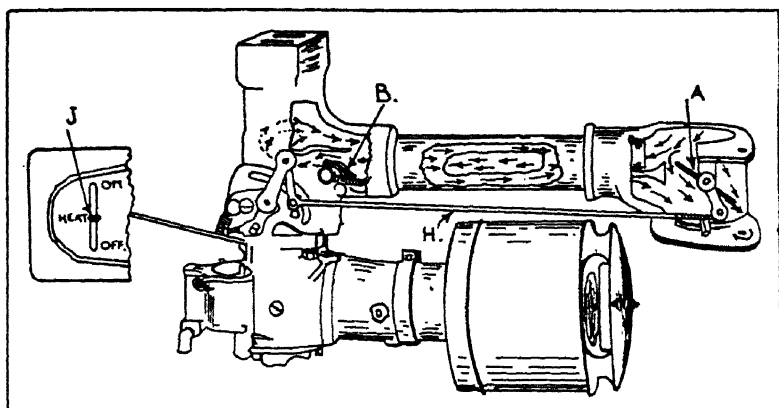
The Exhaust Heating Arrangement, with Dash-board Control, of the earlier Buick Carburettor.
